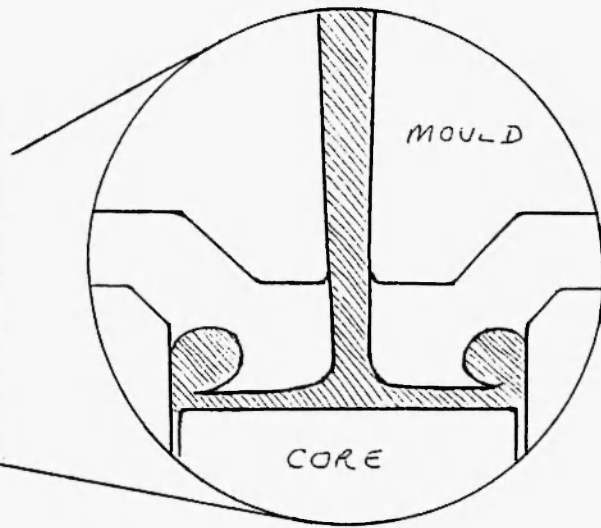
A line drawing from a frame of the x-ray video of filling showing the brief surface turbulence.
